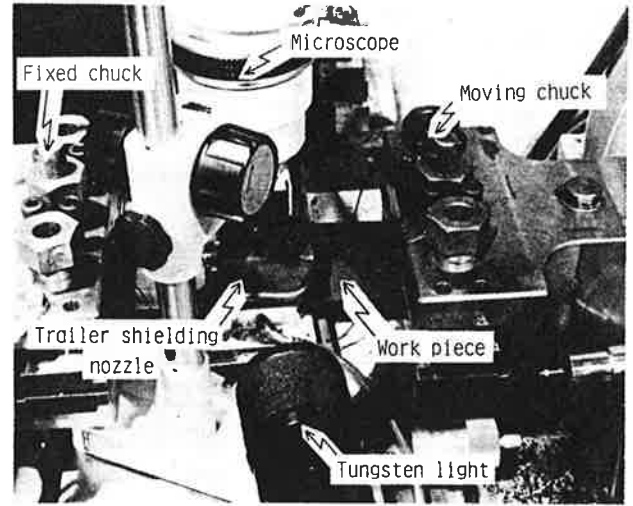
Close-up view of the arrangement in the MISO technique combined with tensile hot cracking test
